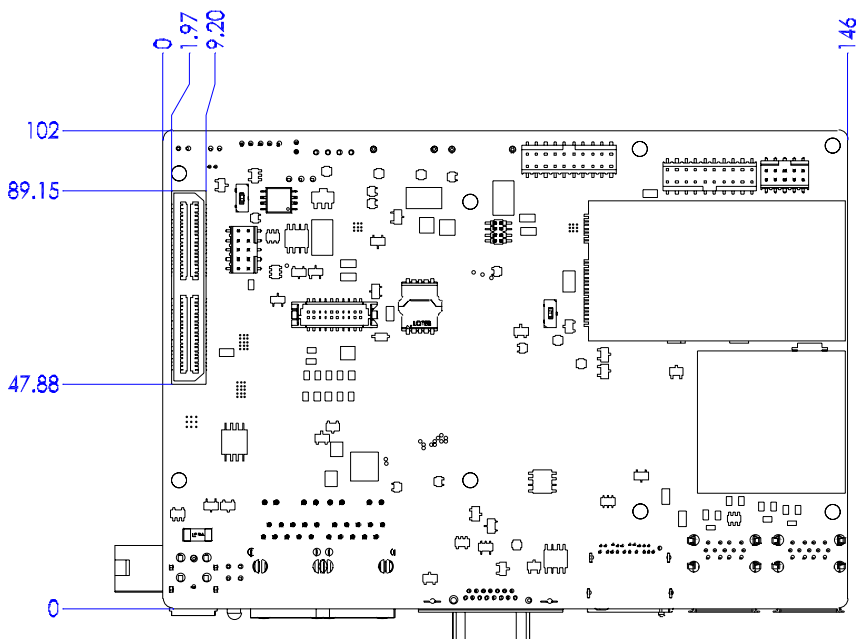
MIO-5271 Mechanical Drawing (Bottom Side)
